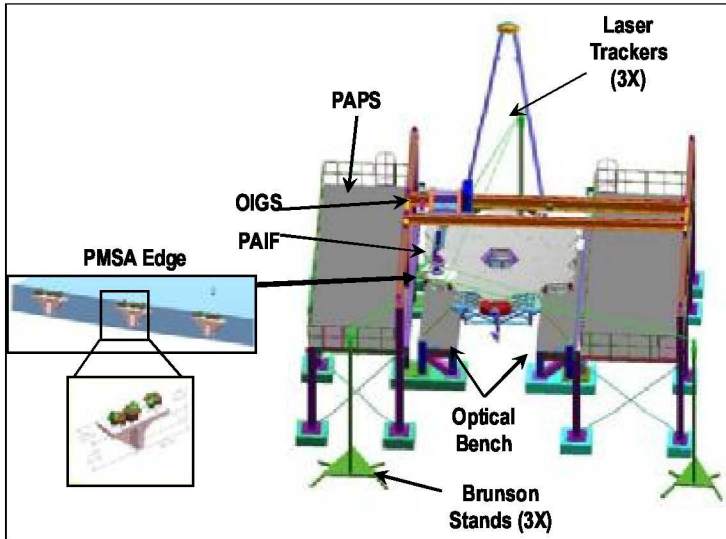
Ambient OTE Assembly Stand configuration illustrating laser tracker usage and SMR cubes mounted to the side of a PMSA
